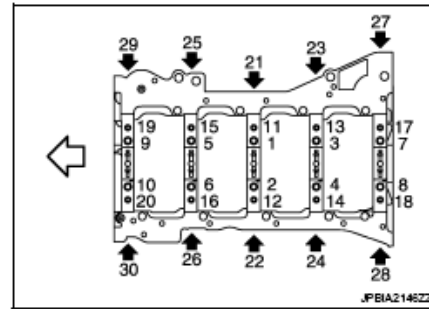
Identifying Cylinder Block Bolts Tightening Sequence
